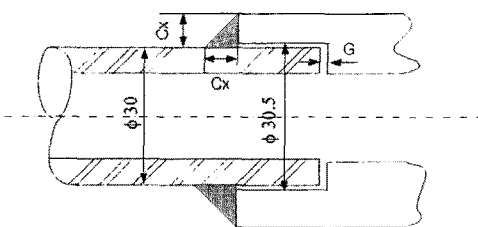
ASME Code NB-4427 on the socket welded small bore pipe; C_x=4.9 mm and slip-on gap, G=1/16 in
